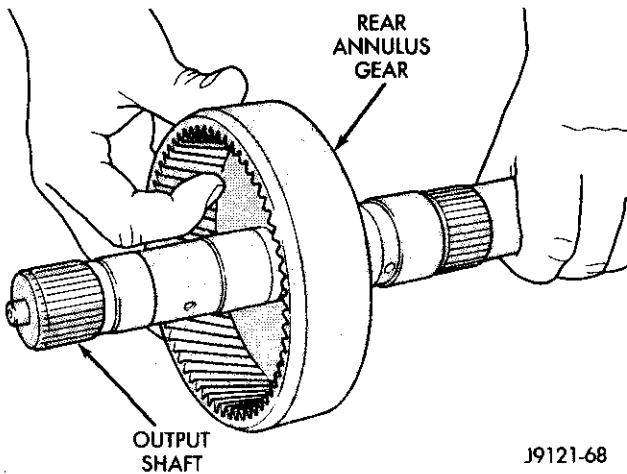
Installing Rear Annulus Gear On Intermediate Shaft
